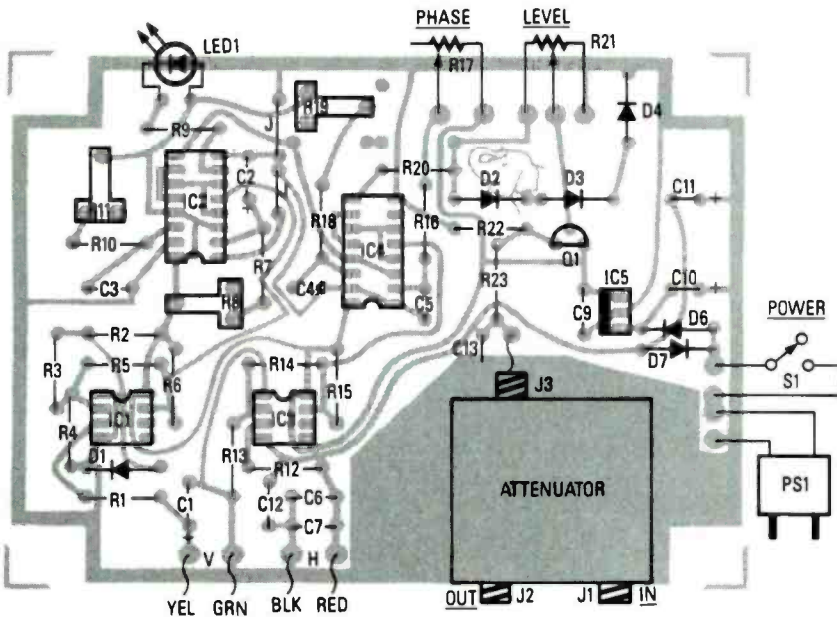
THE PARTS LAYOUT. The attenuator subassembly is installed directly on the component side of the PC board.
